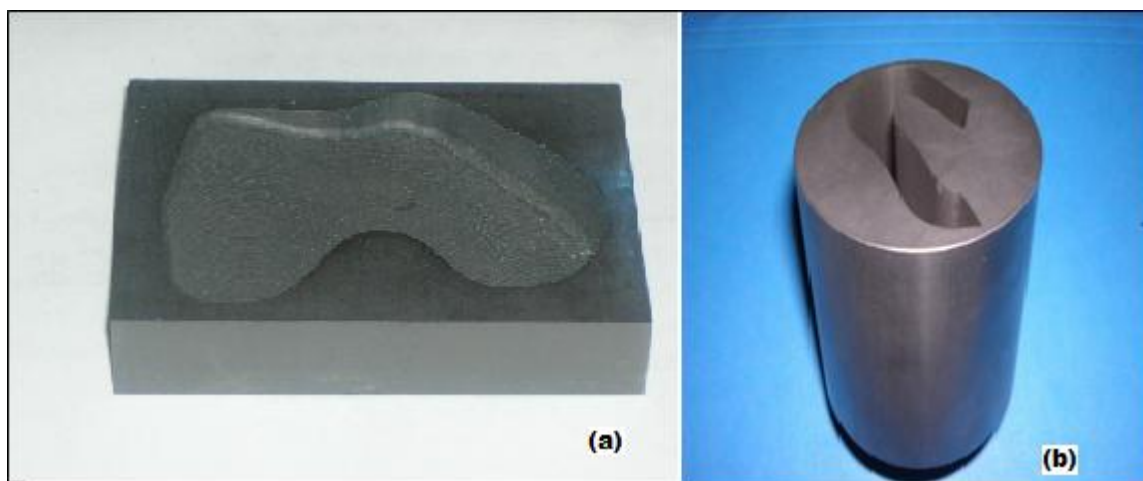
(a) Ceramic mould built by 3D-P rapid prototyping technology, (b) Metallic mould created using EDM technology
